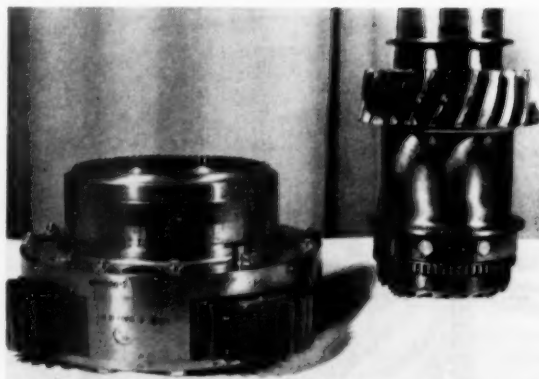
BEARING-JOURNAL SCORING ON HUP PLANET CARRIER AND SPIRAL BEVEL GEAR
